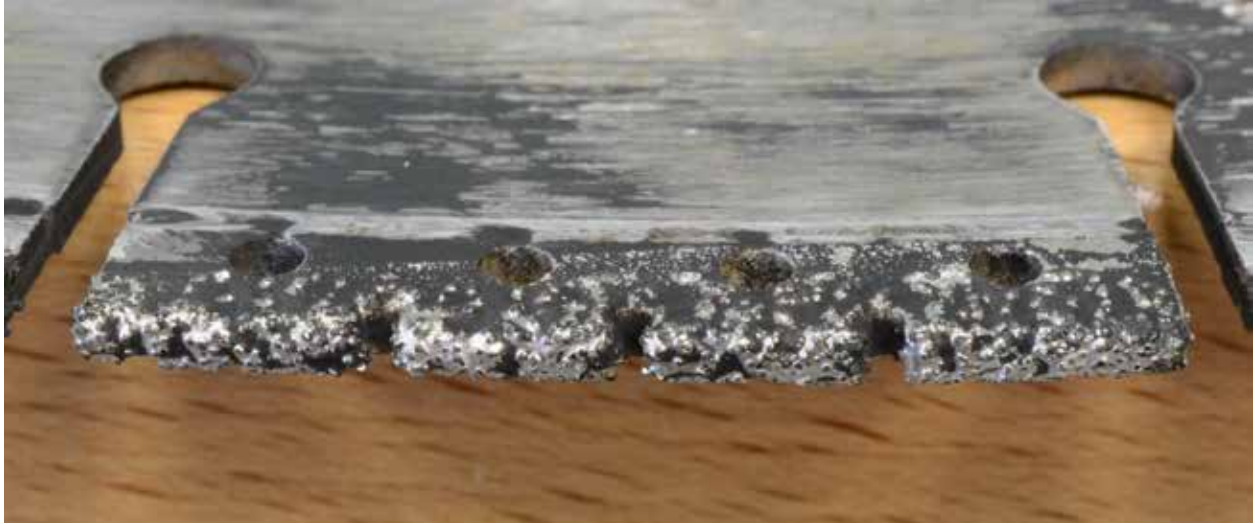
Diamond Saw Blade, AL08, Wet Cuts
